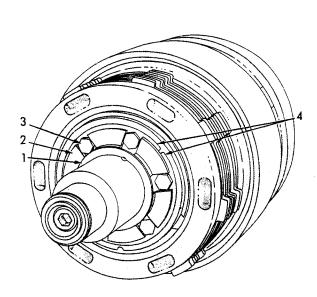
Clutch Shaft Assembly - Clutch Drum and Gear Removed (T-72341)
